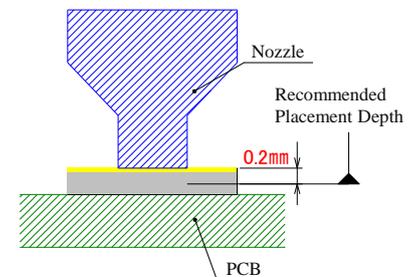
Recommended Nozzle Height for Placement (Placement Depth)
